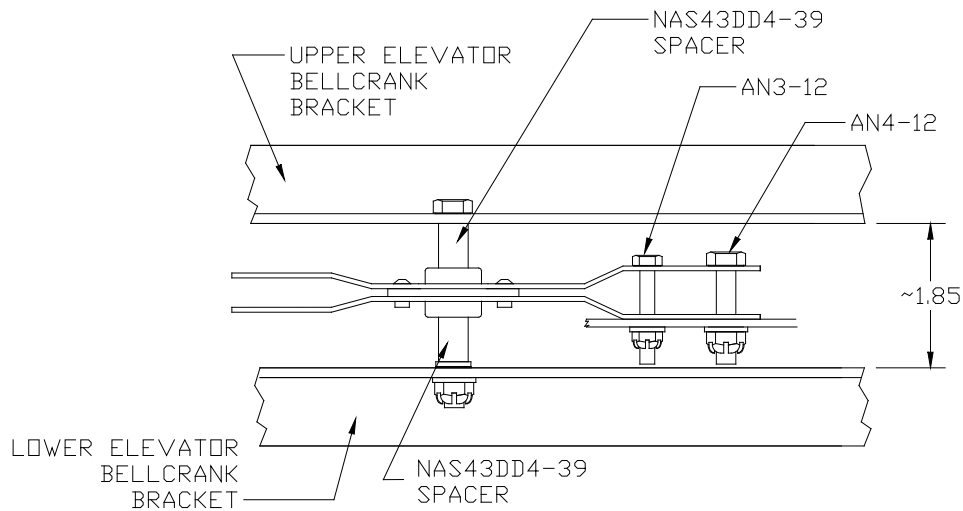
Elevator Bellcrank Assembly and Installation per the Assembly Manual.
